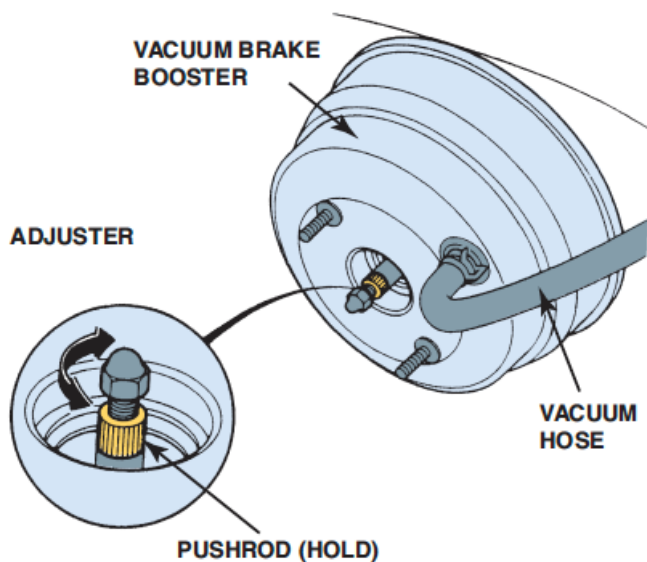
To adjust, hold the pushrod body and turn the friction-fit bolt.
